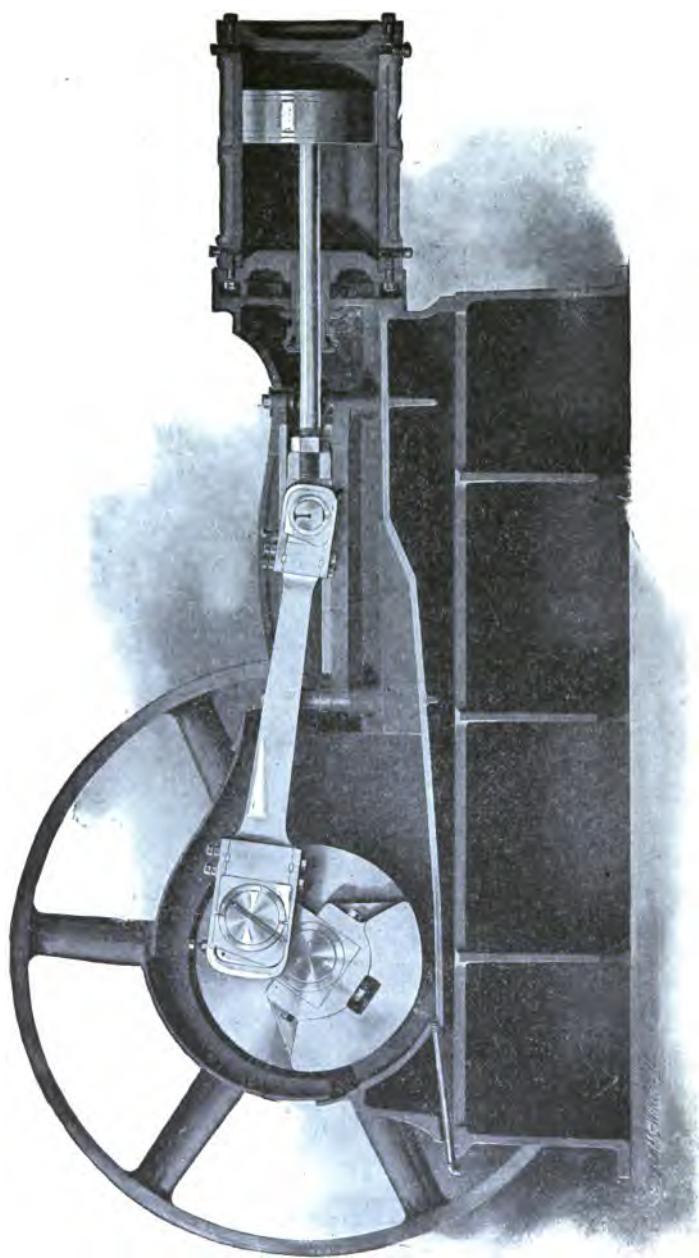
Section Showing Construction of Frame and Base of Side-Crank Engine.
